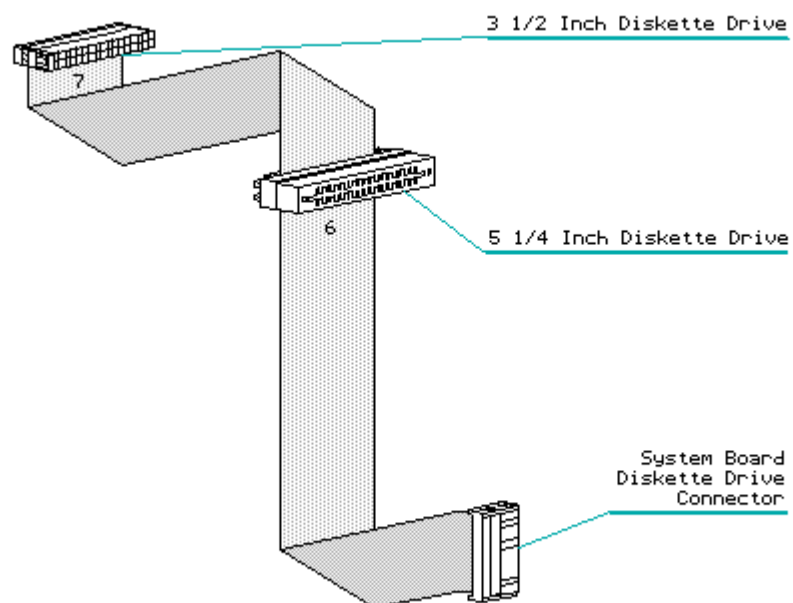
Diskette Drive Cable Fold (Spares Part No. 143706-001)
